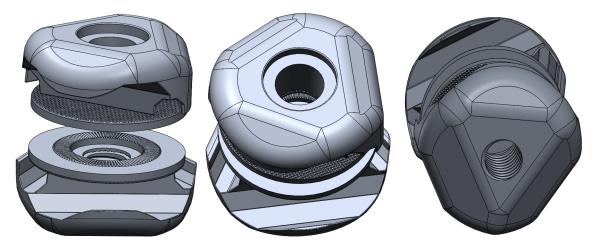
Fifth clamp concept, helical compression spring option; a) Isometric view, b) Top view, c) Bottom view
